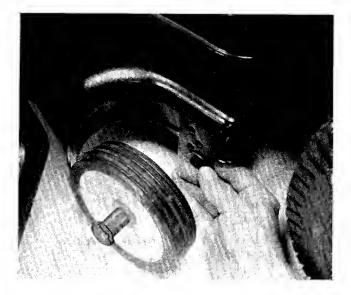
WHEEL HEIGHT ADJUSTER-25" DECK
